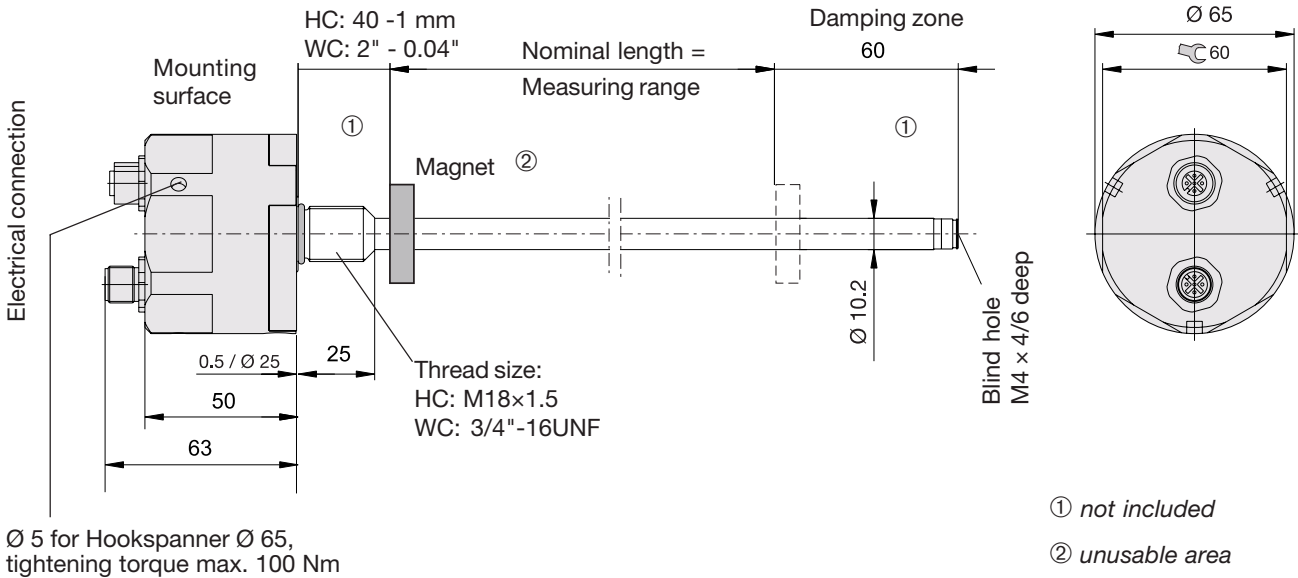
Transducer BTL5-...HC/WC..., Dimensions
